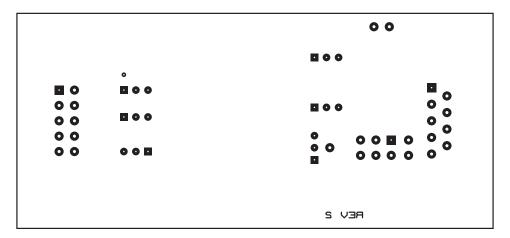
Low EMI Demo Board Layout (DC1746A), Bottom Layer
